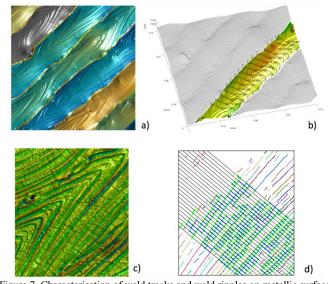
Characterisation of weld tracks and weld ripples on metallic surface fabricated via laser powder bed fusion. Measurement obtained via CSI (adapted from [30]); a) identified weld tracks; b) cross-section width regularity analysis on isolated weld track; c) detail of weld ripples; d) ripple spacing analysis.
